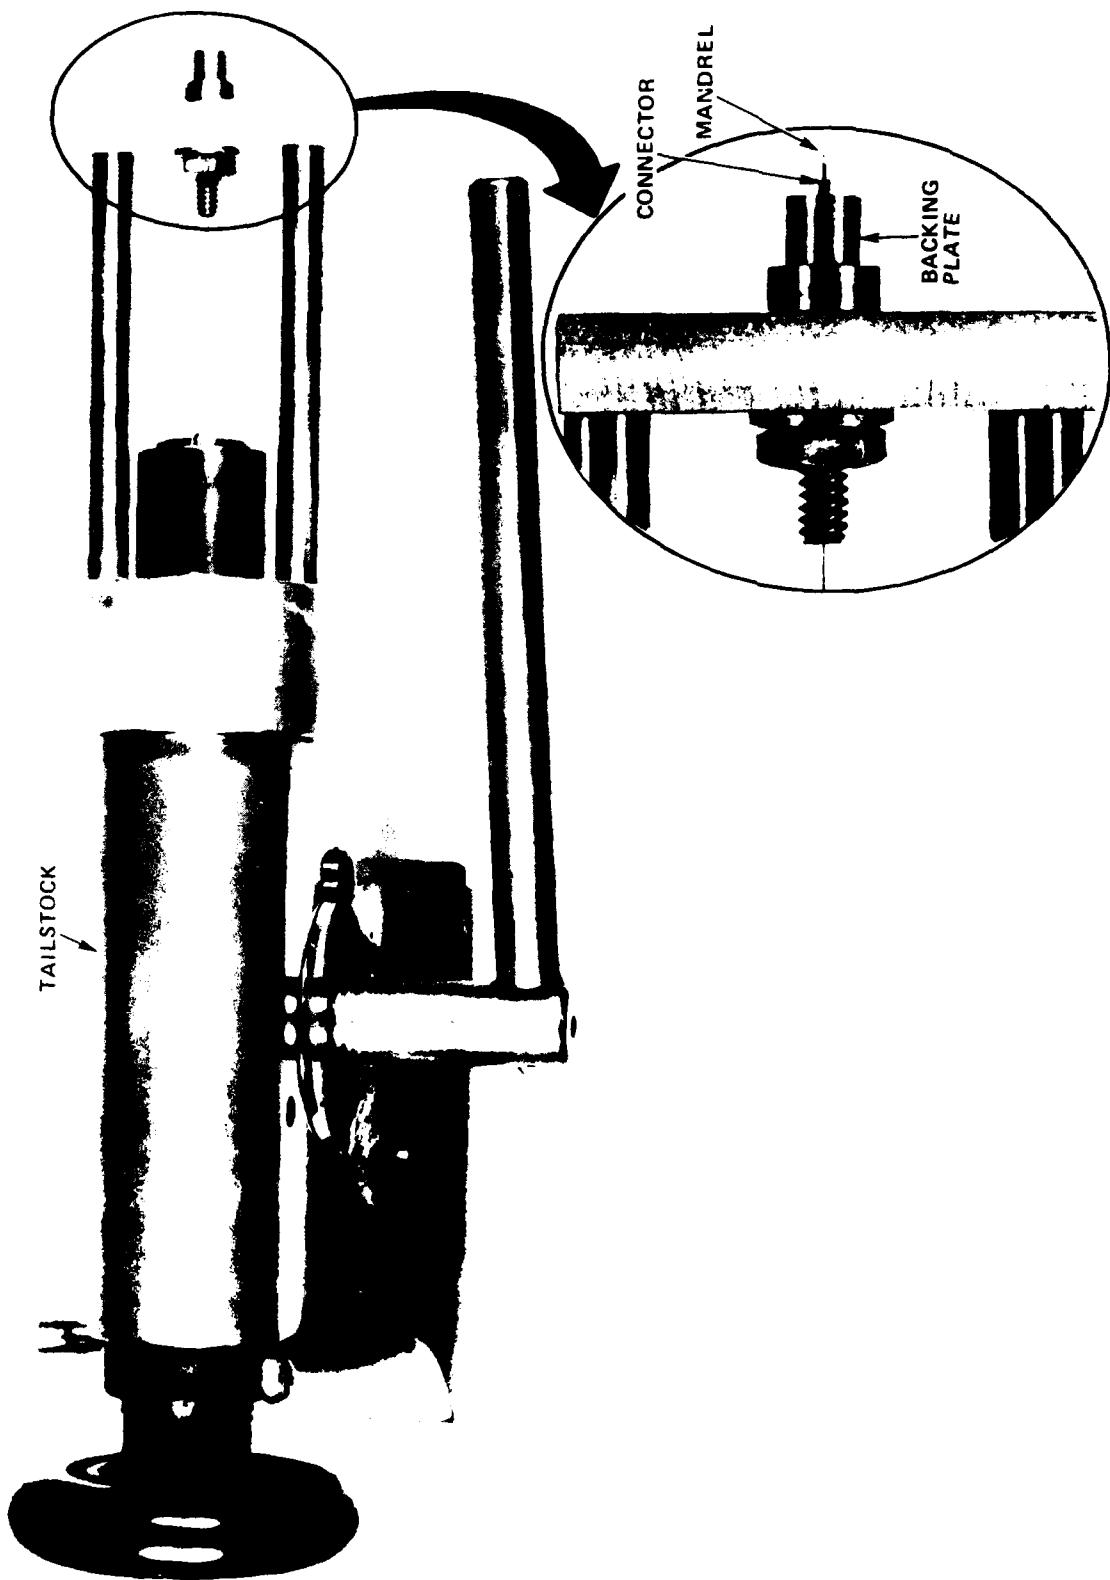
CONNECTOR EXPANSION FIXTURE
